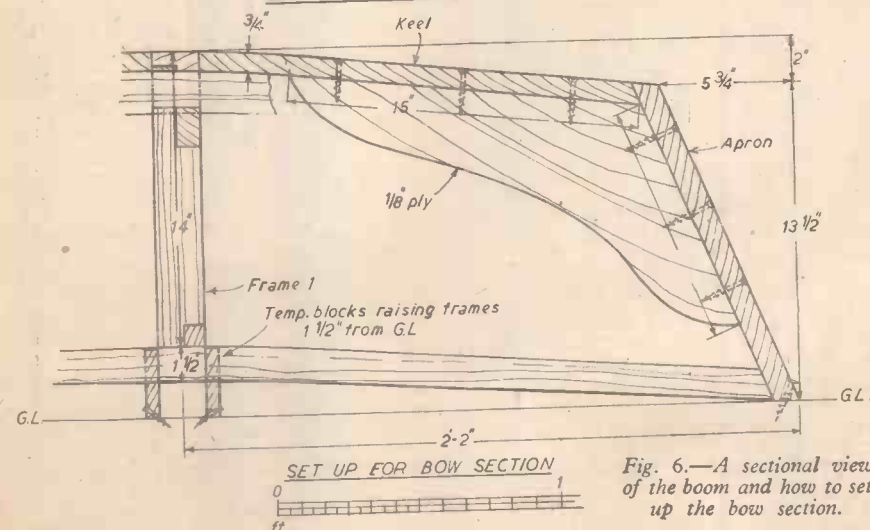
A sectional view of the boom and how to set up the bow section.
